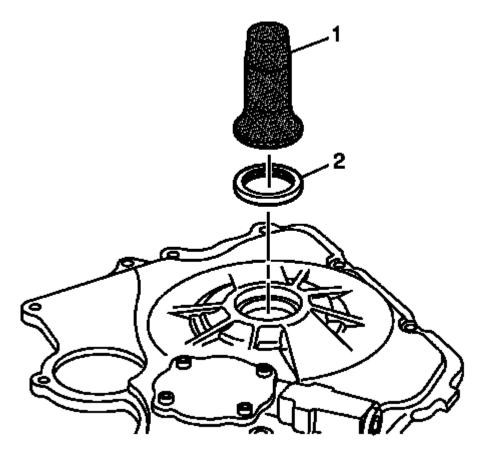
Crankshaft Front Oil Seal And Installer Courtesy of GENERAL MOTORS COMPANY
